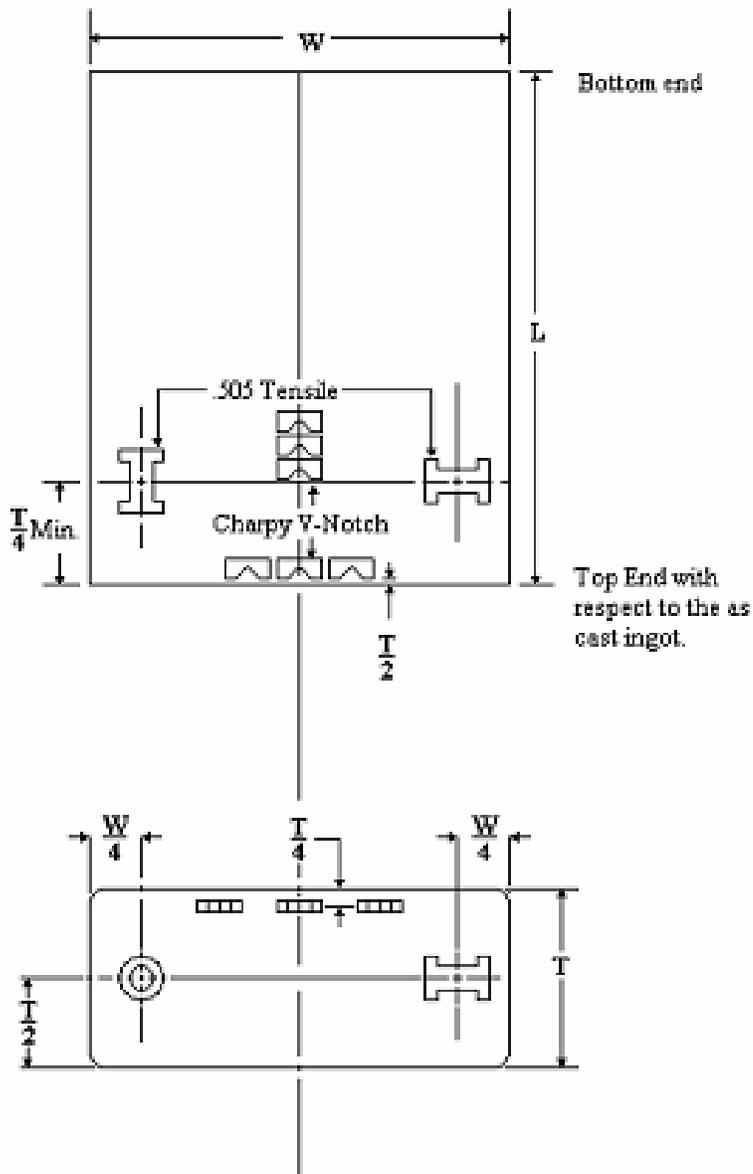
Typical schematic diagram of test specimen location for a 12-inch thick HY-100 forging "rectangular-like" in cross section. (See E.4.3.1.4 for additional specimen locations, and see E.4.4.3.2.)
